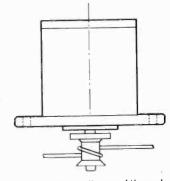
Shows the pulley and thread arrangement for one of the stepper motors.
